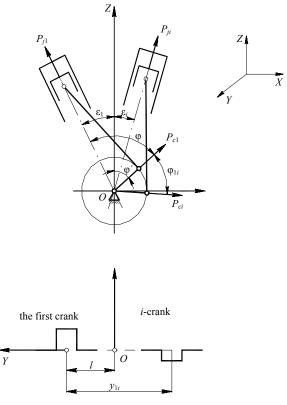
Generalized calculated scheme of the crank and connecting rod mechanism
